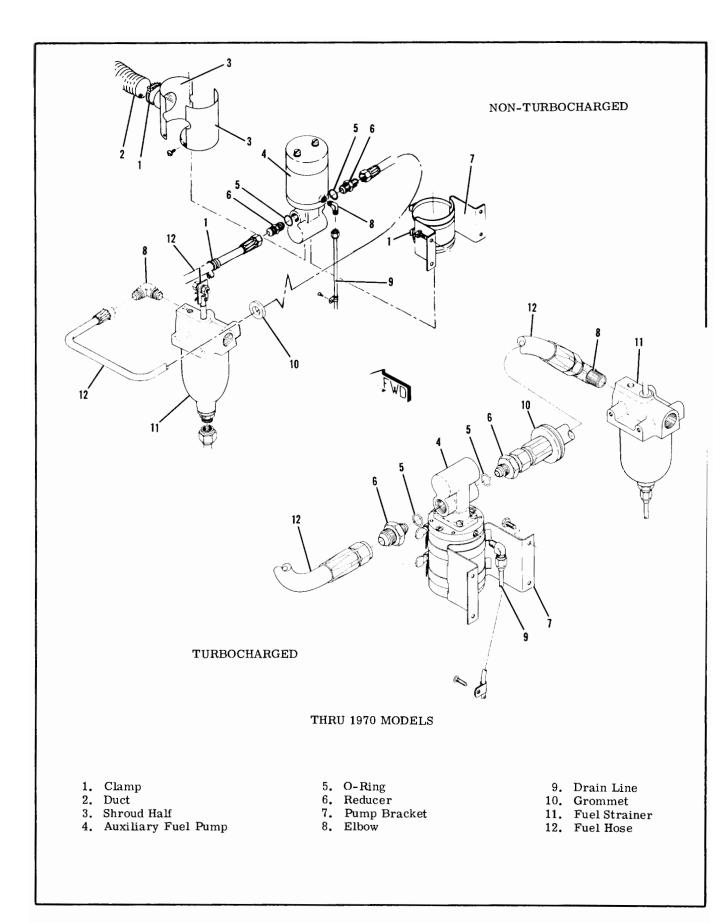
Electric Fuel Pump and Strainer Installation (Sheet 1 of 2)
